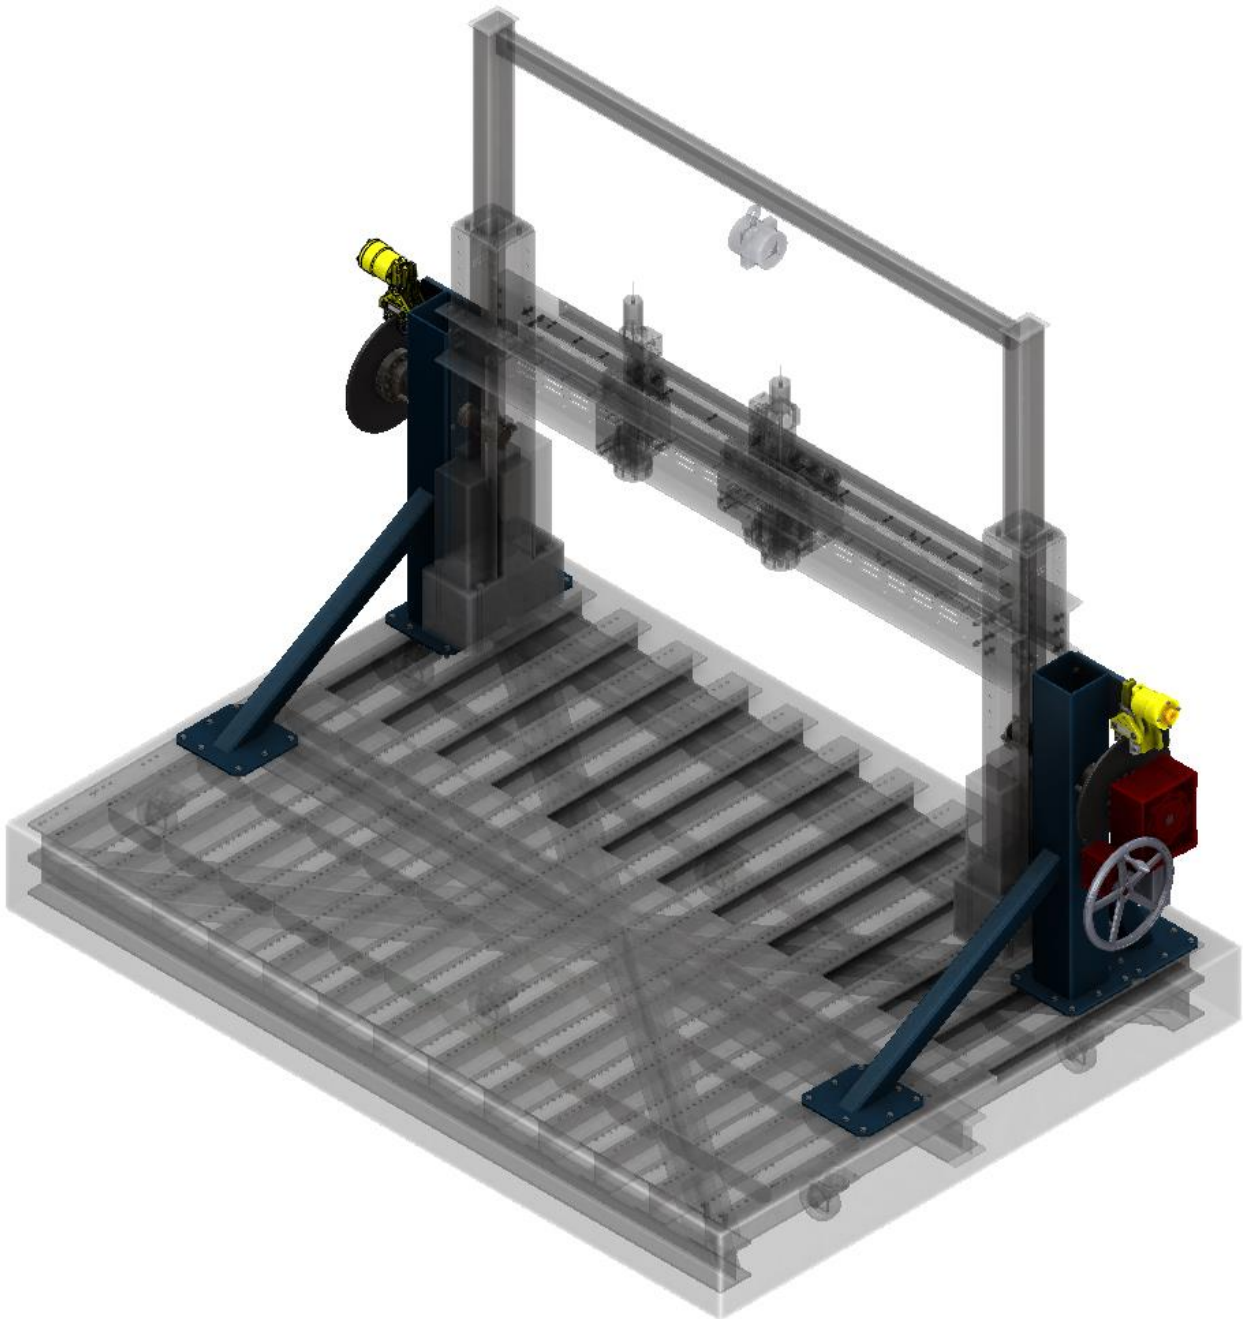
Pillars of the equipment (rest of the structure in transparent)
